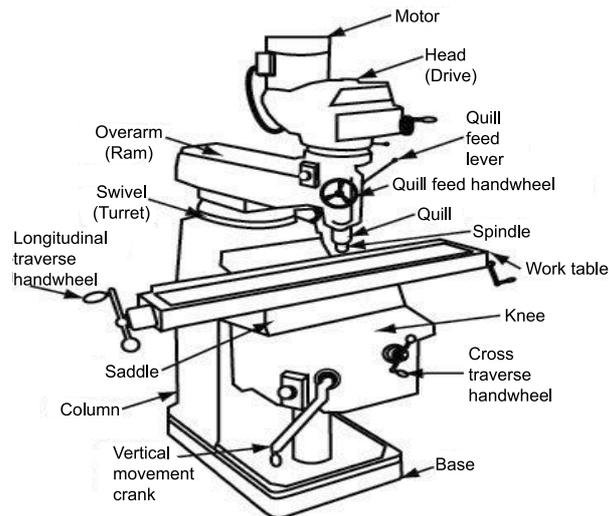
Milling Machine (Source: in.pinterest.com)
